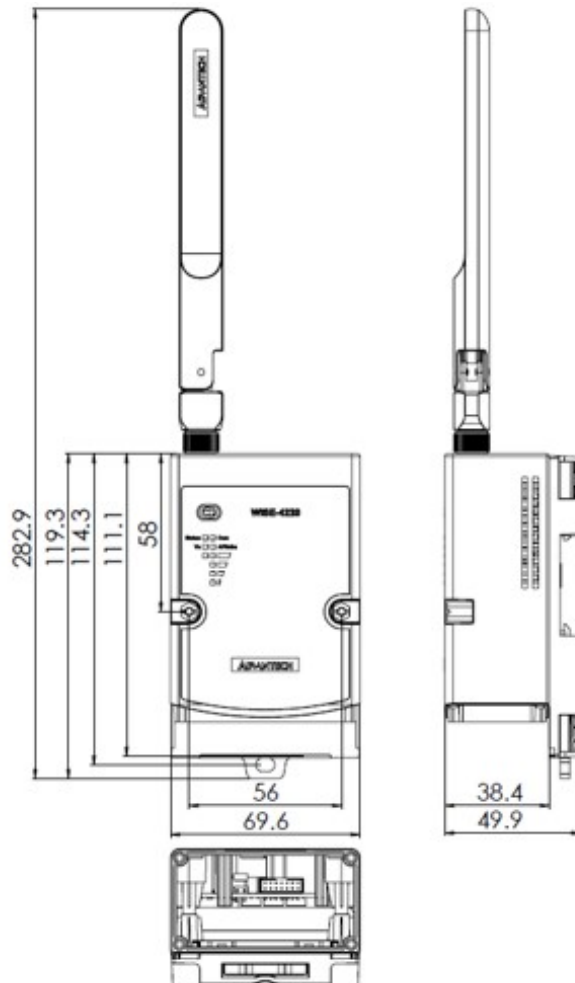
Mechanical Dimension Front, Side and Bottom
